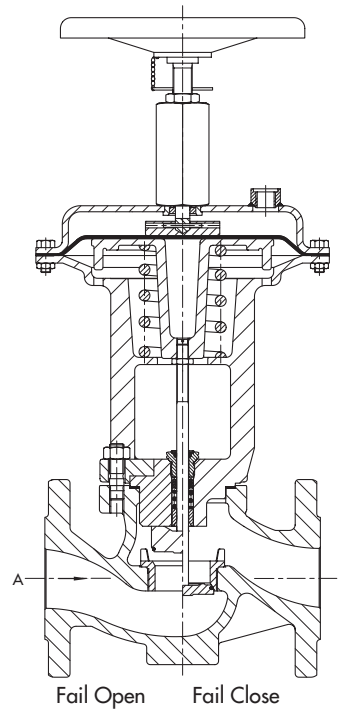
· Type 3351-1 Pneumatic On-off Valve with handwheel
